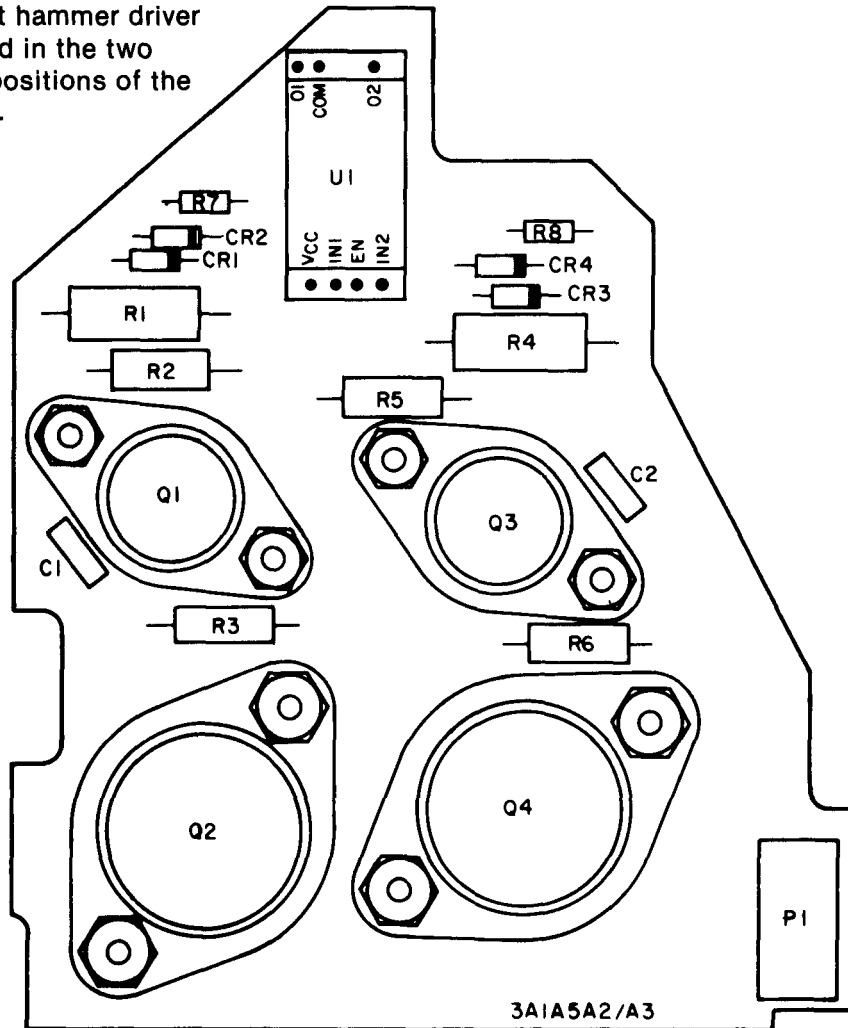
(1). PRINT DRIVER (Sheet 1 of 2).
